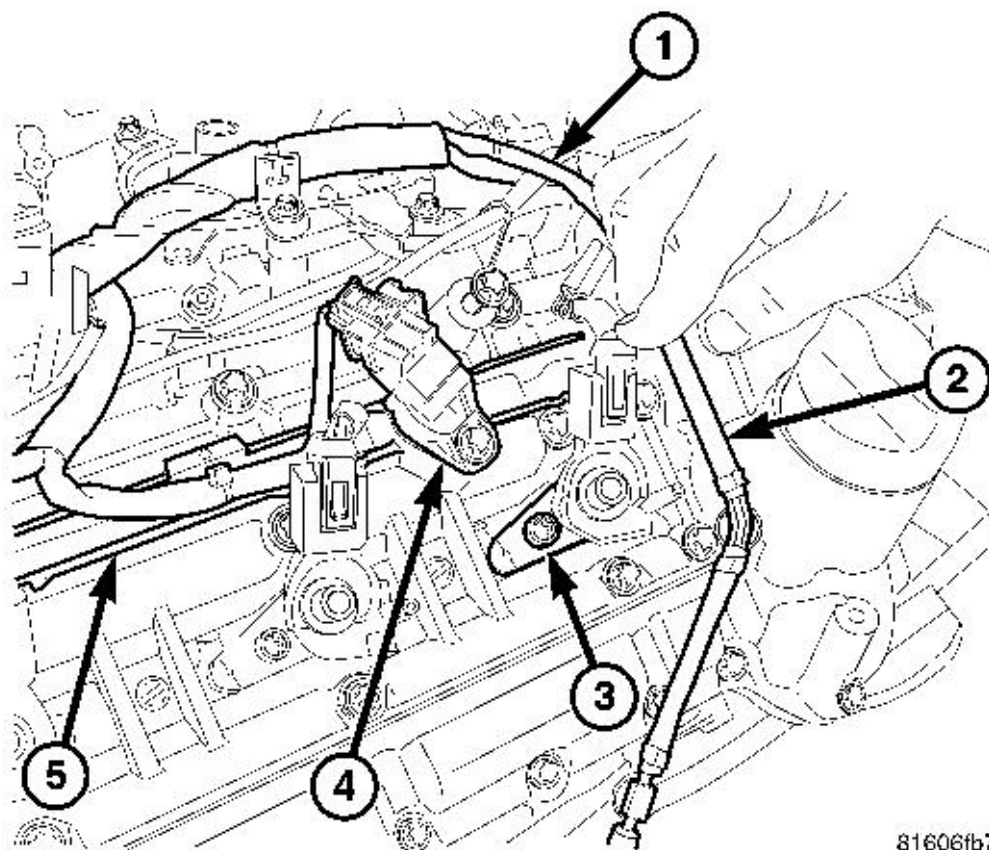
Identifying Oil Separator, Heater Hose With Bracket
